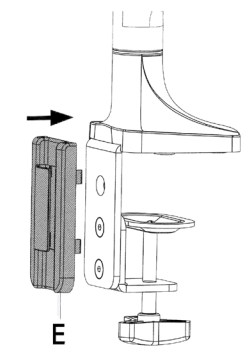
Cover the clamp mechanism D with the plastic cable guide cover E.
